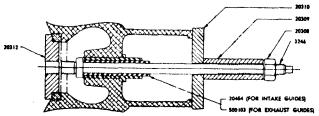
Valve Guide Puller and Inserter - Tool No. A3373
